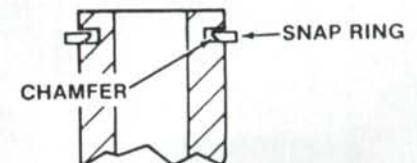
When reinstalling drive gear in injection pump drive housing, install snap ring with chamfered edge downward.
